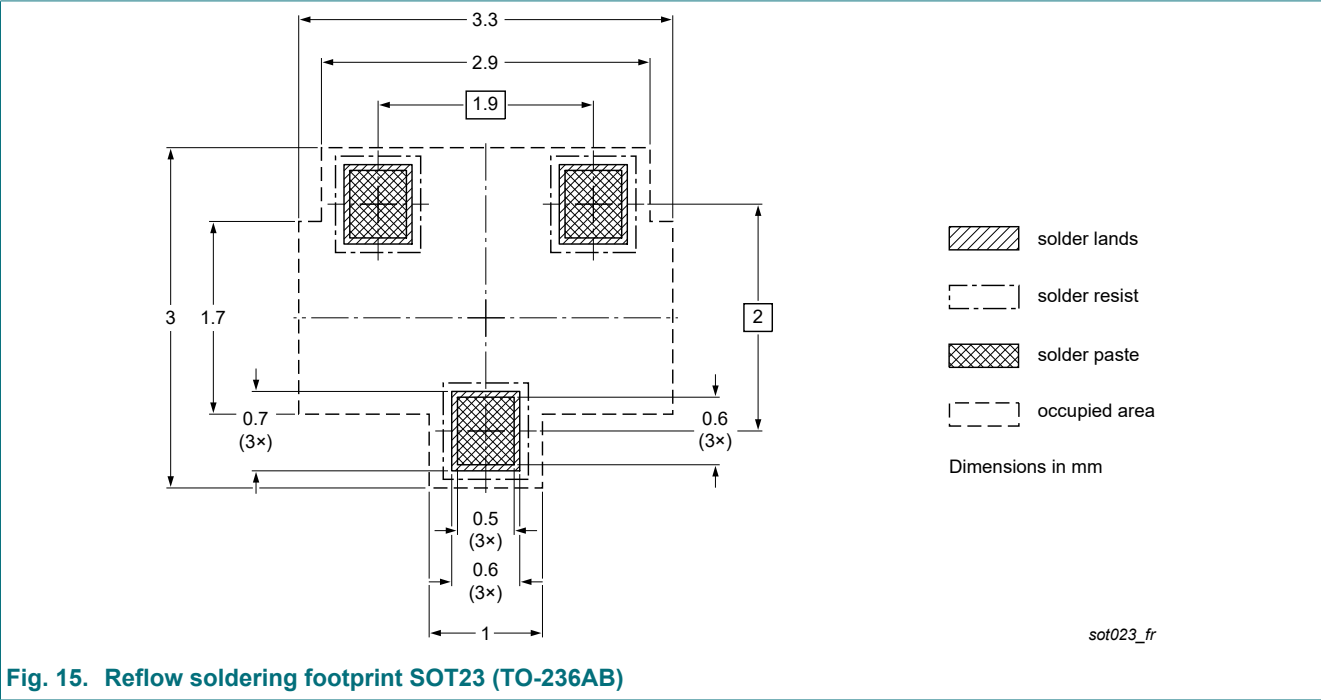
Reflow soldering footprint SOT23 (TO-236AB)
